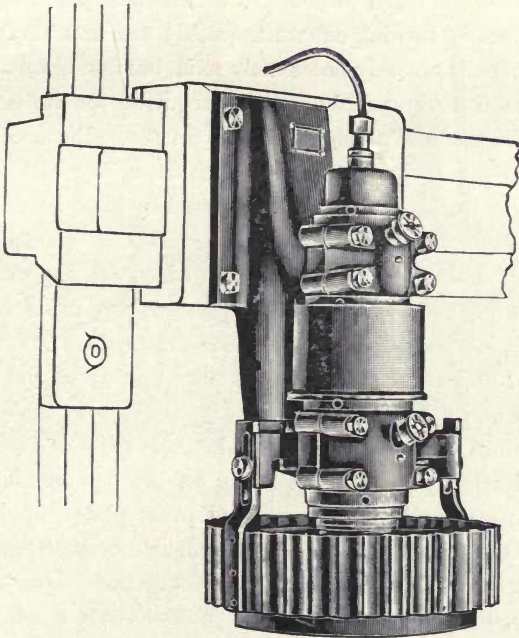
Grinding Head, with Central Water Feed, and Vertical Grinding Surfaces.
